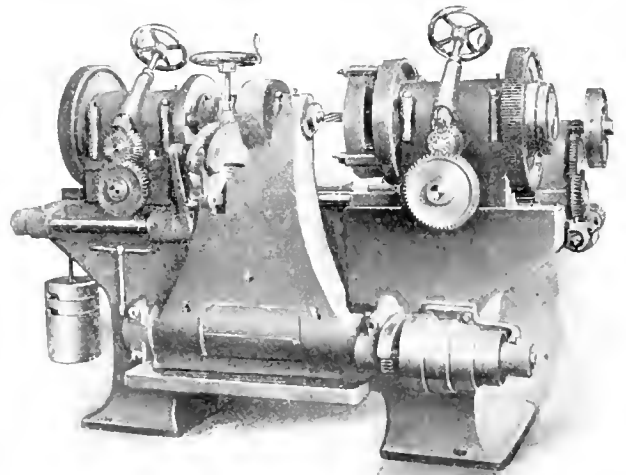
Rear View of Cam Cutting Machine, showing Spindle and Forming Roll Support.
